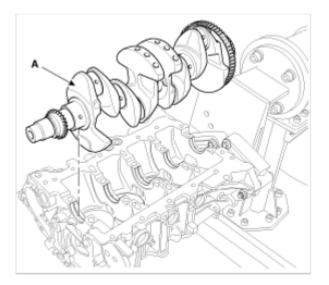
Identifying Crankshaft Courtesy of HYUNDAI MOTOR AMERICA
